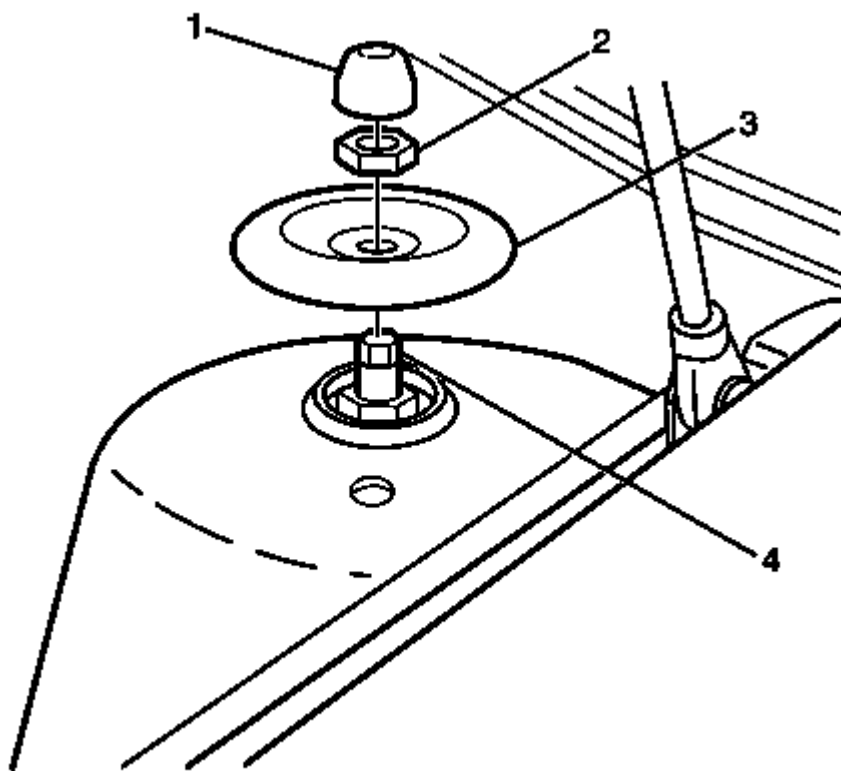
View Of Strut Piston Shaft, Stud Dust Cover, Front Wheelhouse Retaining Plate & Nut
